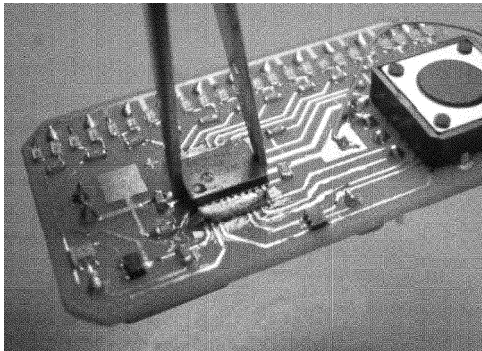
To desolder the chip, apply plenty of solder to all the pins, lift the board by pulling the chip with a pair of tweezers, and heat the solder on both sides.
